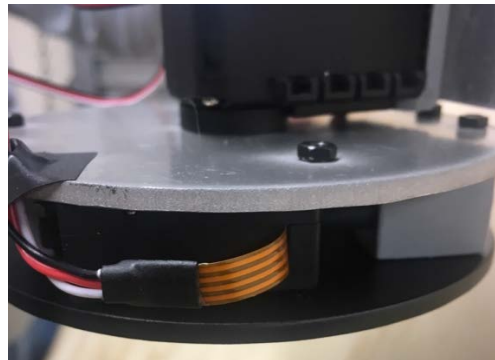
Attach the bottom and top plates of the foil cutter with the two screws and nuts.
